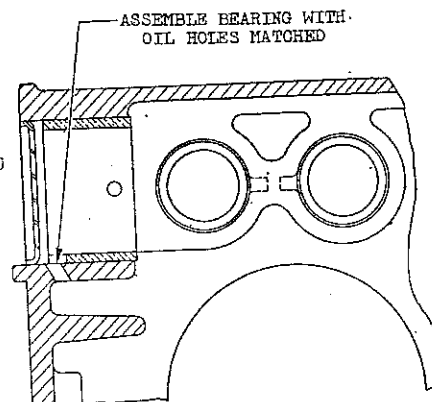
Installing rear camshaft bearing on 239, 257, 286, 331, 400 and 450 engines
